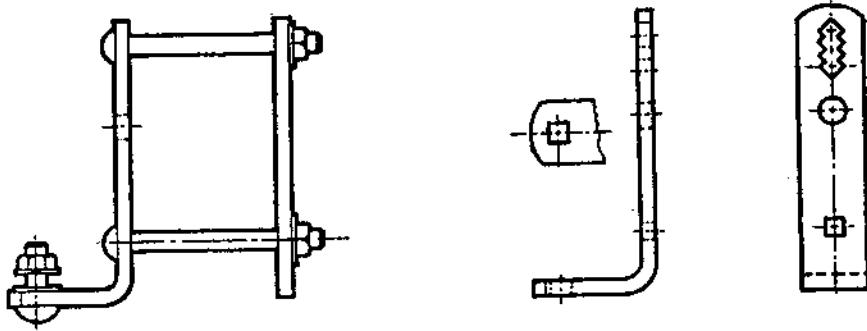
Type B mounting bracket. See ANSI C.37.42 fig.2 for dimensions and details.
